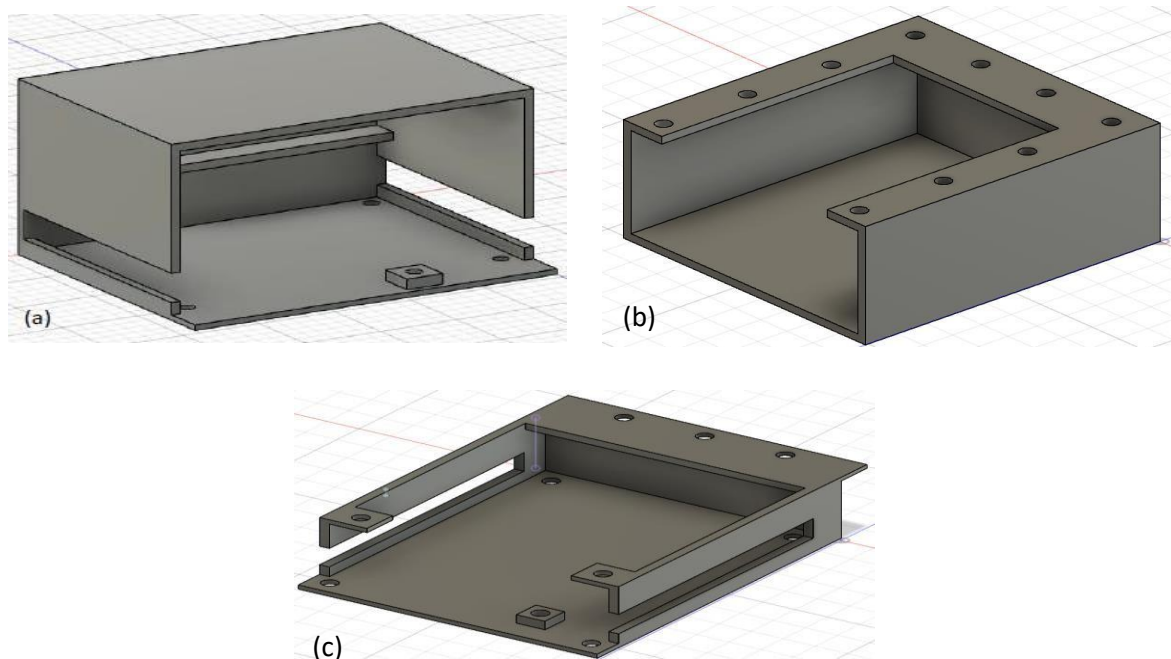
3D designs of the top part of the shielded enclosure. (a) previously designed part. (b) the top part of the divided part. (c) the bottom part of the designed part.
